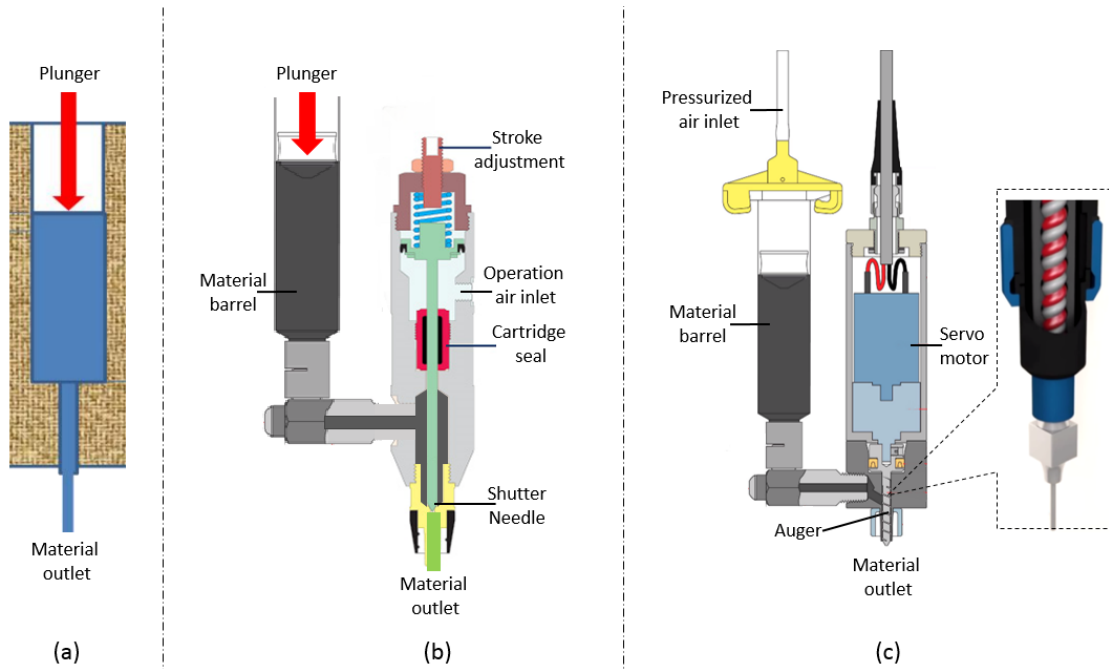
Schematic of three extrusion mechanisms: (a) Ram extruder (b) Needle valve (c) Auger valve [14, 15].
